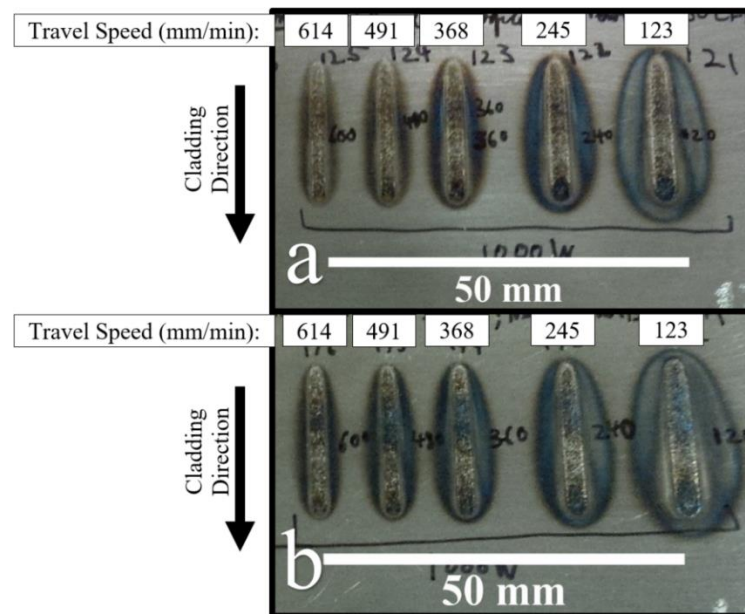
Effect of nozzle design on cladding appearance. a: TIG nozzle; b: MIG nozzle. The parameters used were: Laser power = 1000 W; Powder feed rate = 2.0 g/min; Auxiliary shielding gas inner diameter = 15.9 mm; Auxiliary shielding gas flow rate = 14.1 L/min; Powder condition = as-received;
